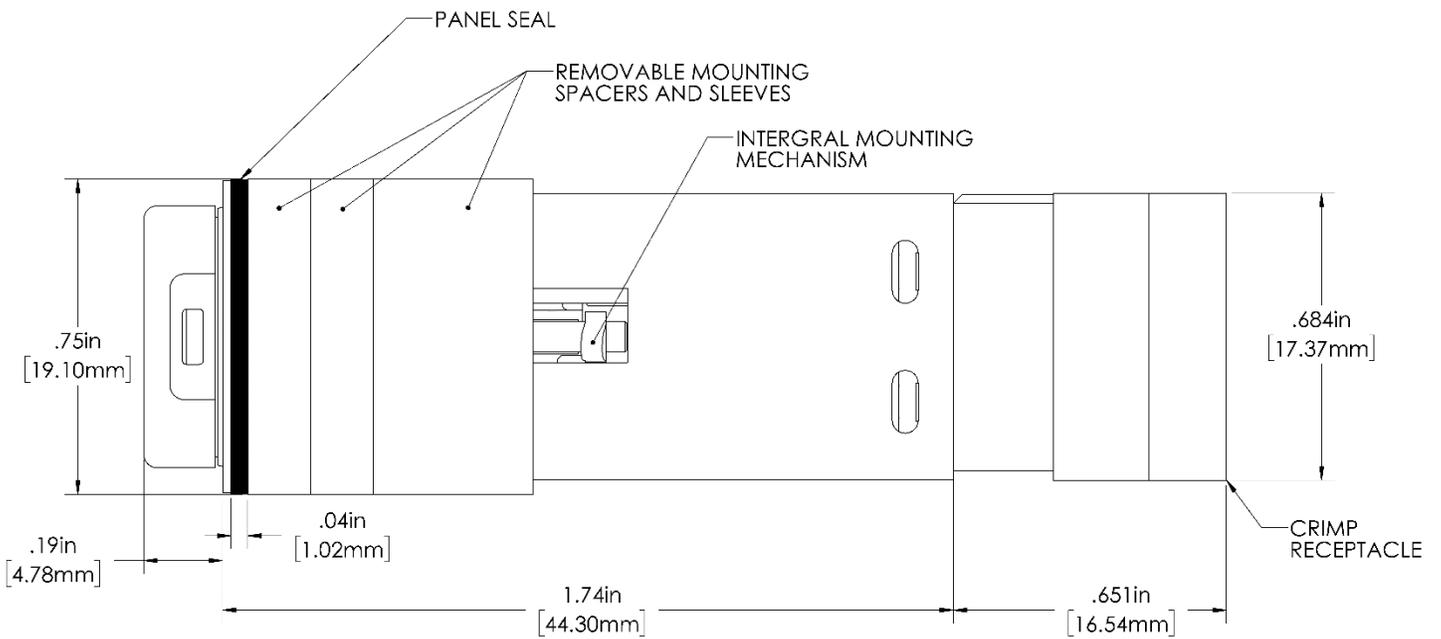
Drip-proof switches – Enclosure Type V crimp pin termination (side view)
